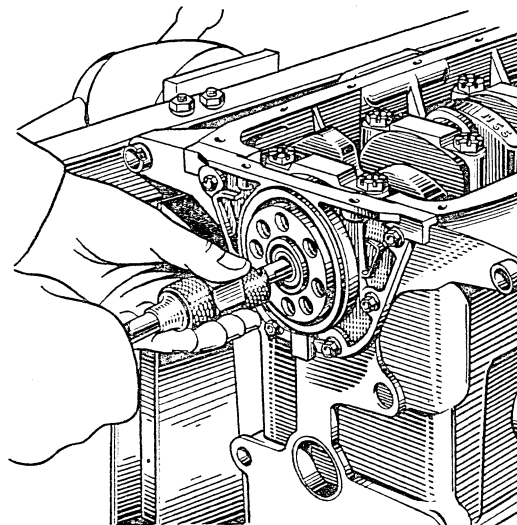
Driving out the Gearbox Shaft Bearing from Crankshaft with Remover Tool A.40006
